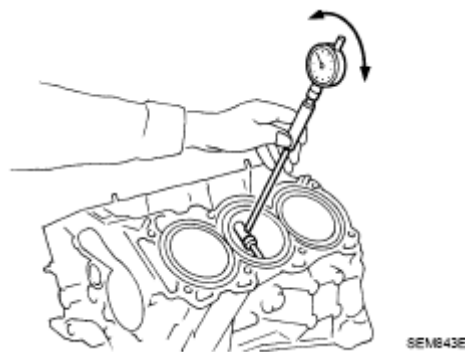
Checking Clearance Of Piston-To-Cylinder Bore
